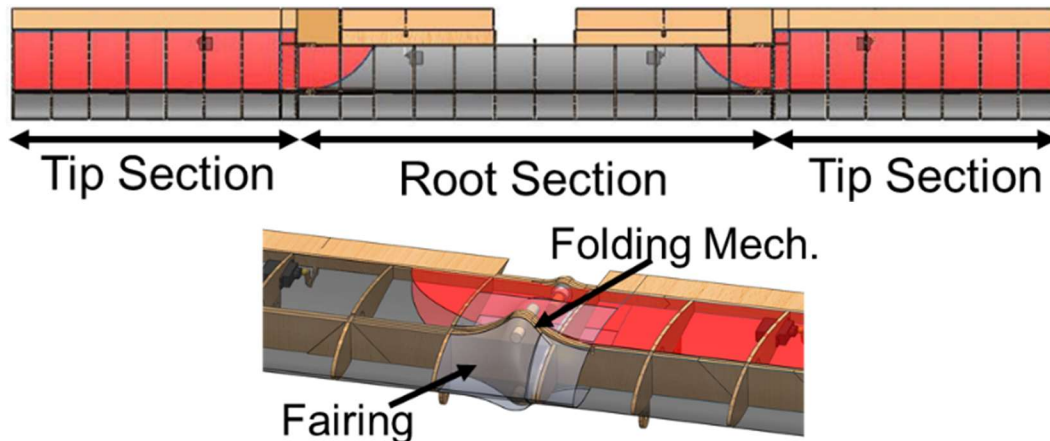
Full Wing Assembly (top) with integrated folding mechanism with fairing (bottom)
